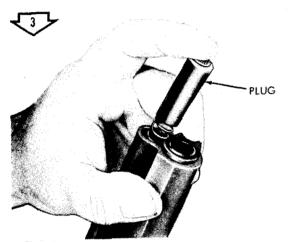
Operator's disassembly/assembly of Caliber .45 Automatic Pistol, M1911A1. (1 of 8)
